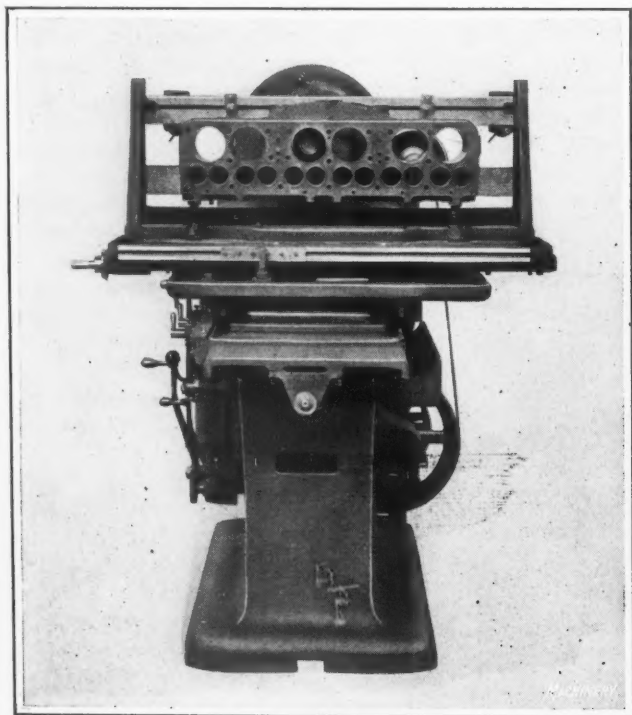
End View of Heald Grinding Machine showing the Manner of setting up a Cylinder Block
